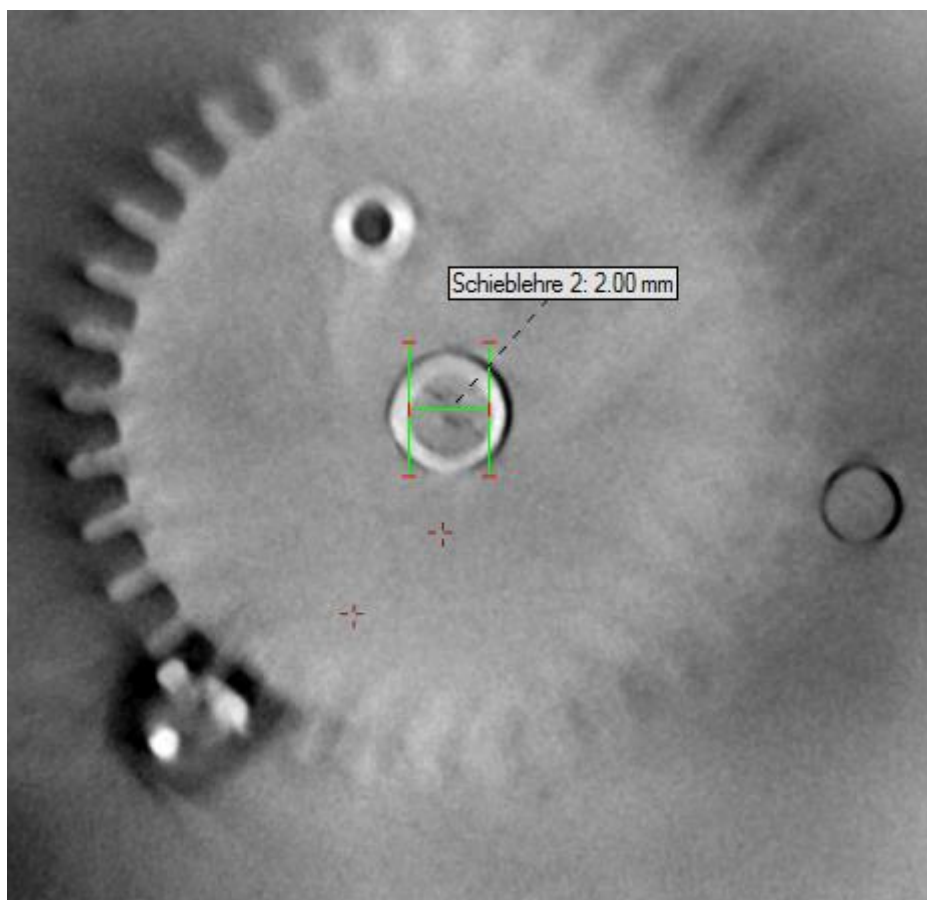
Illustration CT: Lined wheel axle of the hour wheel - inner diameter
